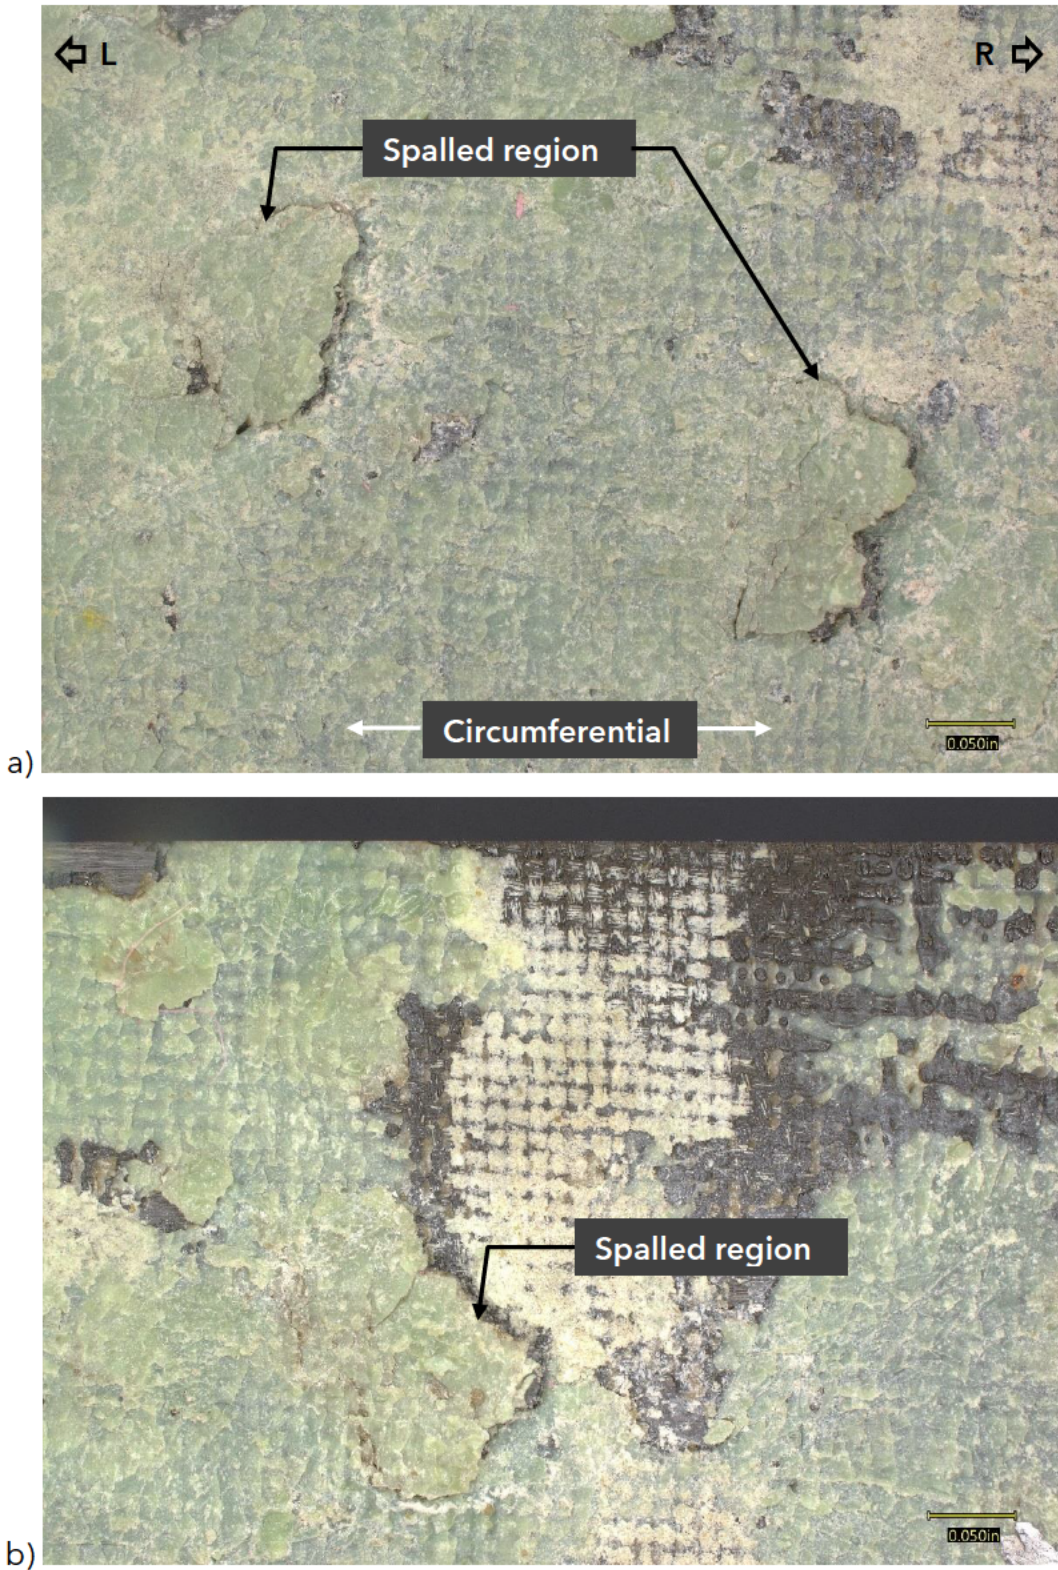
a) Fracture along left side and b) fracture along right side.
